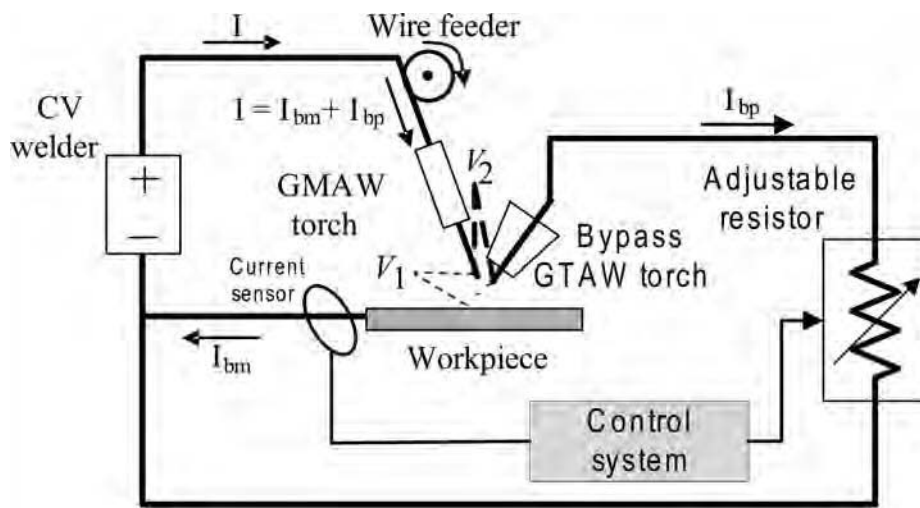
Nonconsumable double-electrode gas metal arc welding (GMAW). GTAW, gas tungsten arc welding
